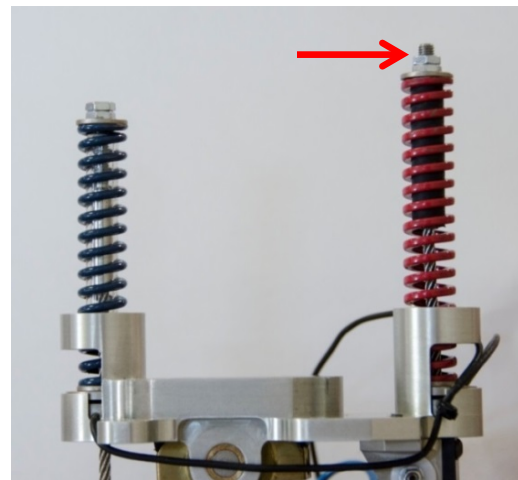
Jam nut installed on top of adjustment nut on rear spring tower.
